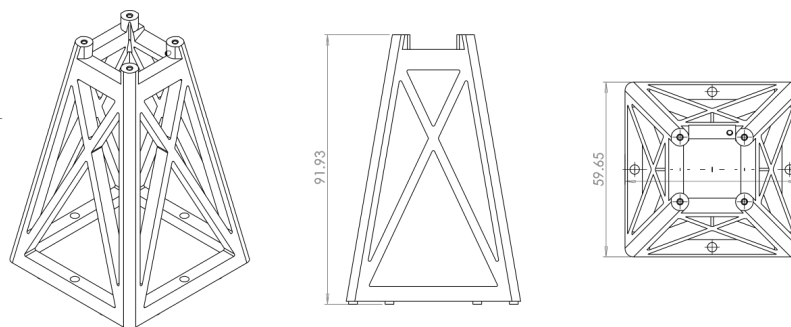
A drawing of the Titanium trap holder. This holder connects the ion trap assembly of [Figure 4.3](#) to the top flange of the vacuum chamber, as shown in [Figure 4.2](#). All dimensions are in mm.
